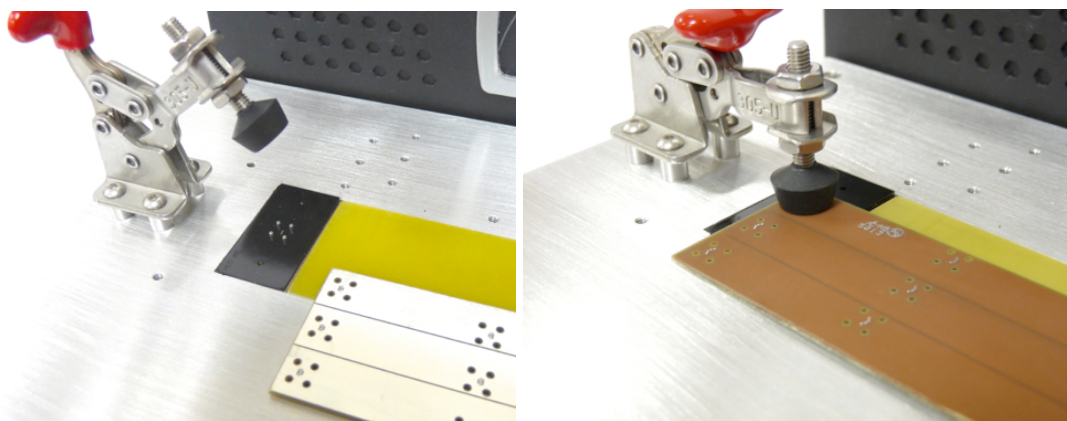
nTegrity test coupon fixture showing robust electrodes, test coupon, and test coupon clamped onto alignment pins and signal electrodes.
